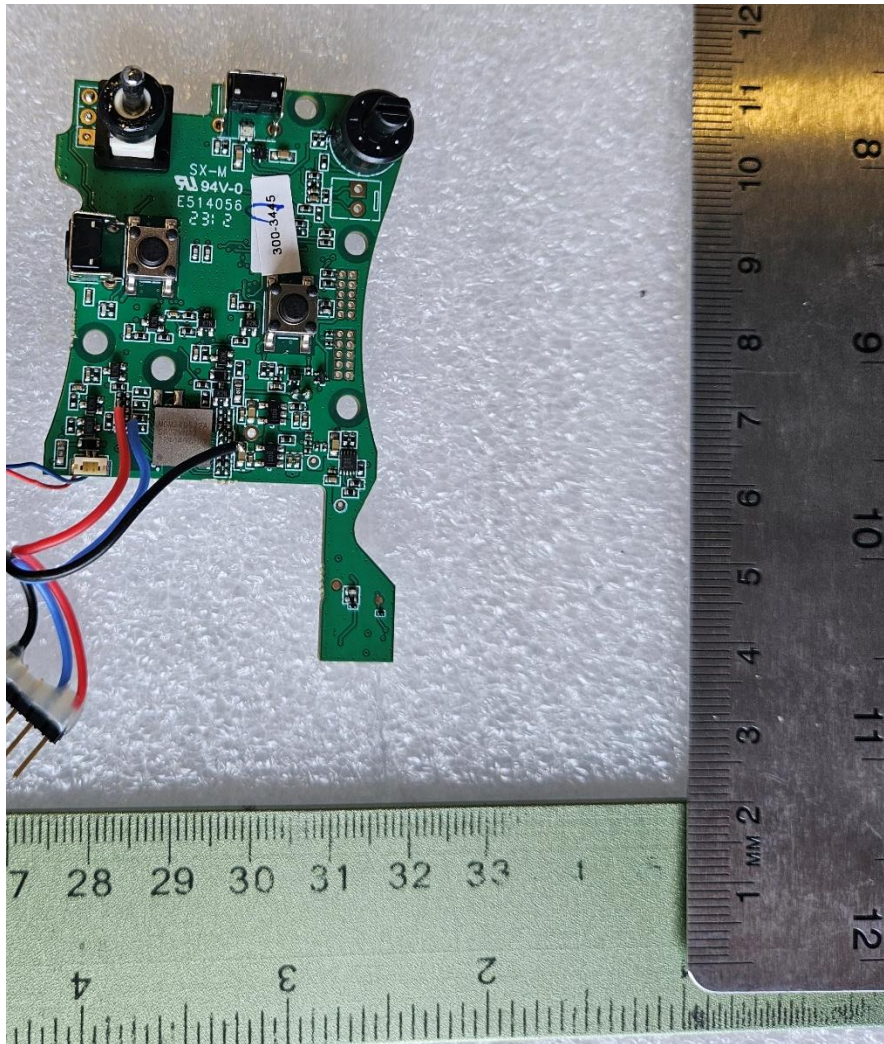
Main PCB Back, Half-Mile (300-34451-1)
